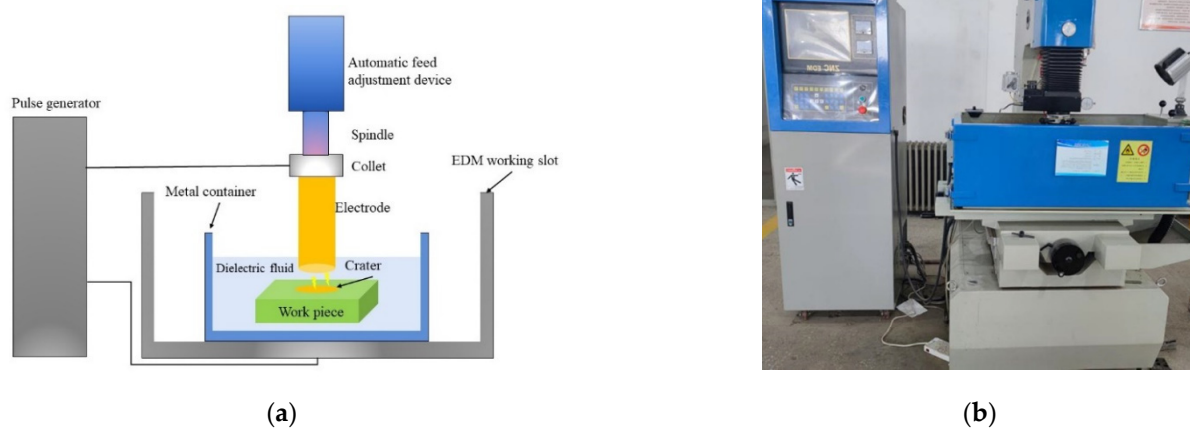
Schematic diagram of processing and experimental equipment; (a) schematic diagram of machining process; (b) EDM machine used in the experiment.
